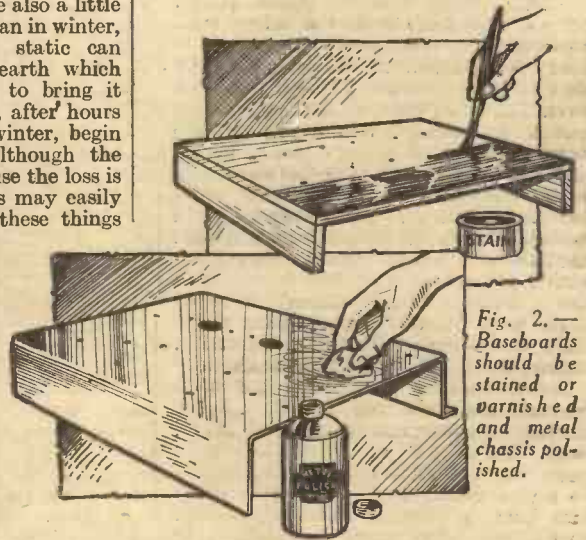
Baseboards should be stained or varnished and metal chassis polished.
